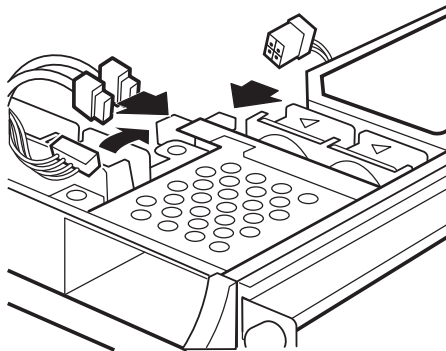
Connecting Cables to the SAS IF Assembly
